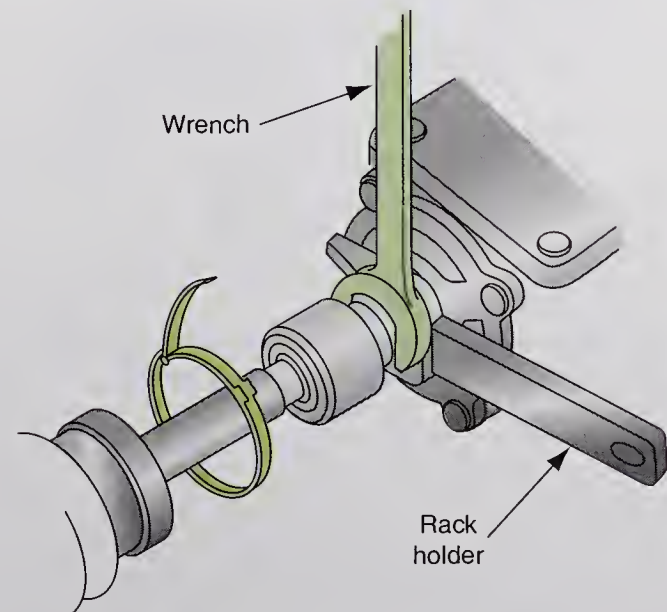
Removing the tie-rod from the shaft screw.
